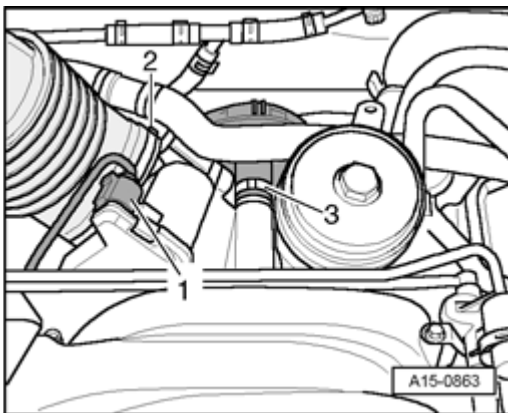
Disconnecting Electrical Connection At Throttle Valve Control Module J338 & Crankcase Ventilation Hose At Intake Pipe
